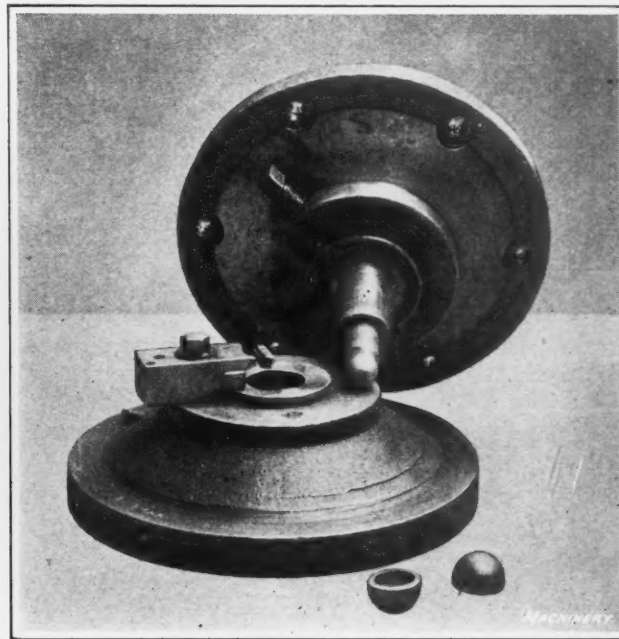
Punch and Die employed in blanking the Hemispheres from which the Ball is made
